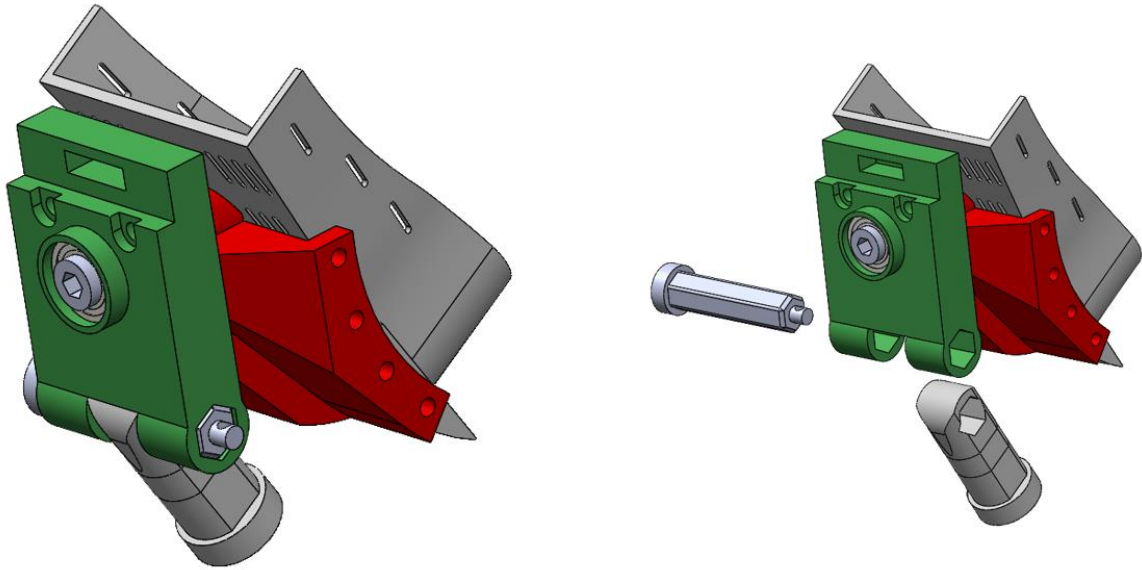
First geometry used for the anterior translation movement simulation (left). Exploded view (right).
